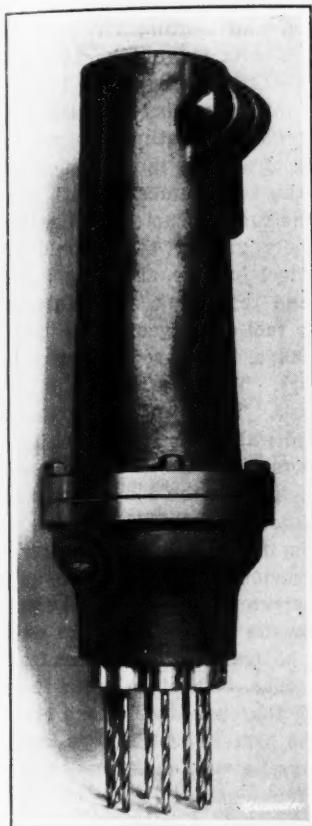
Eight-spindle Drilling Head of Fixed-center Type
